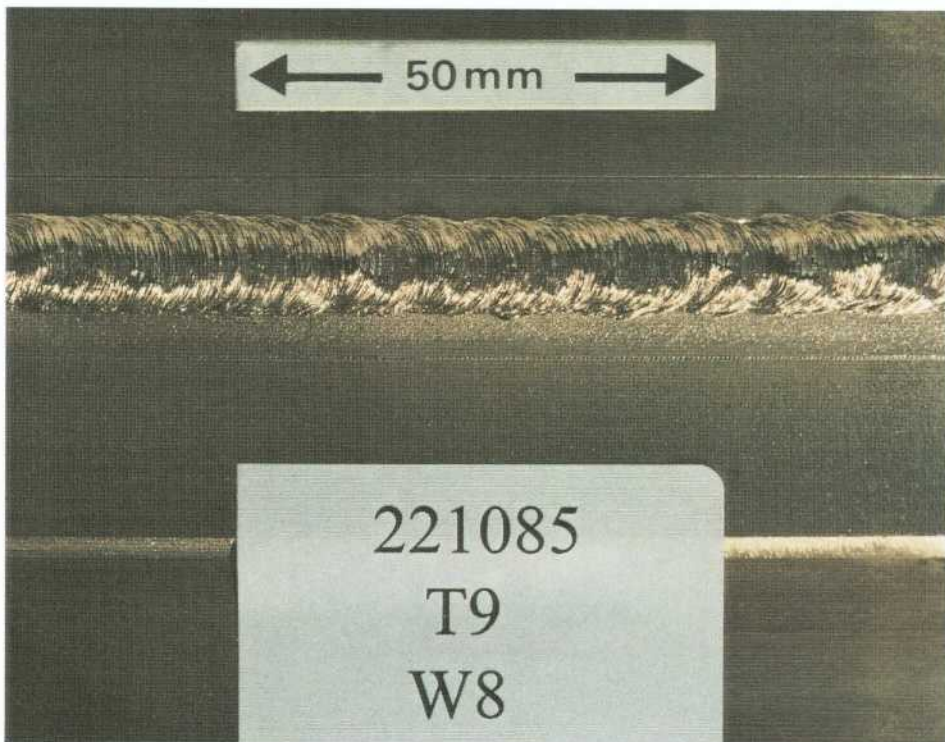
Section of the weld seam on TB 3/T 9.
